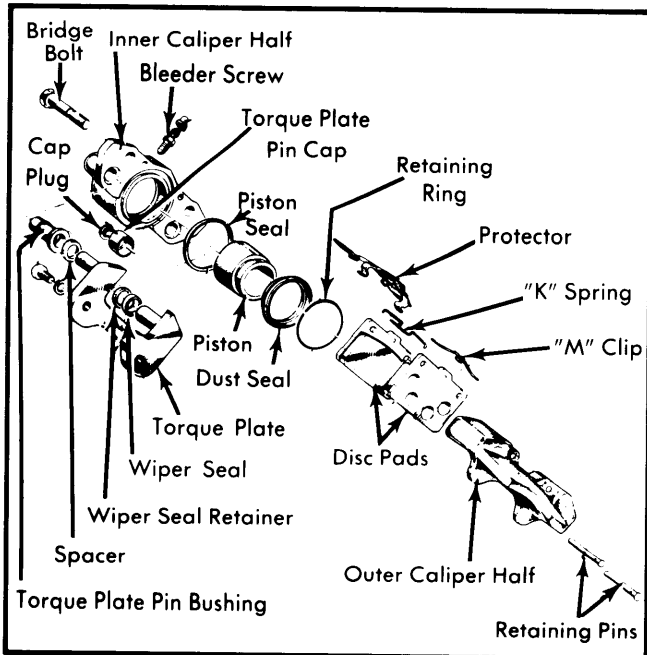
Disassembled View of Disc Brake Caliper (Arrow, Champ & Colt Hatchback)
